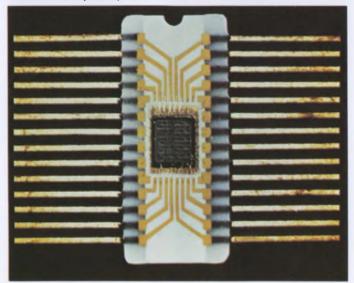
Completed Uni-Cell circuit mounted in 28-lead package ready for testing and capping.
